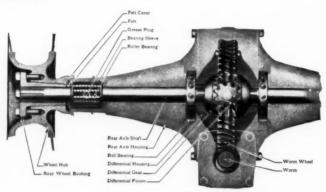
Sectional view of a tractor rear axle showing bearing details and methods of hibrication.
